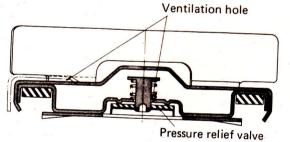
Sectional view of fuel tank filler cap (Sec. 27)
